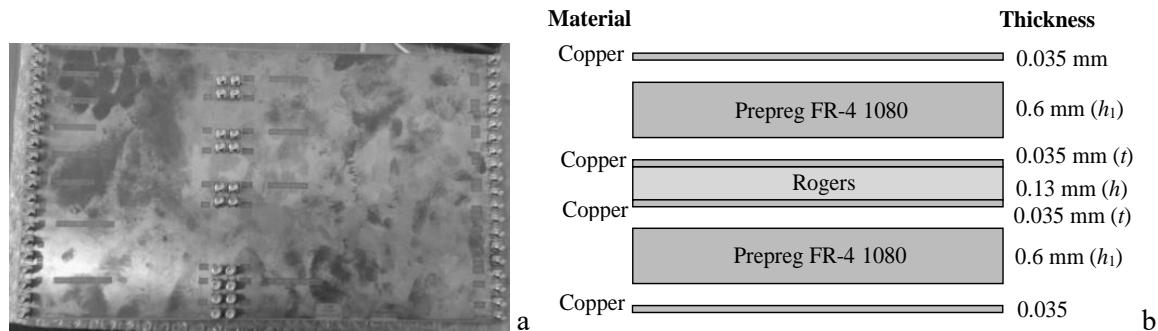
Photograph (a) and stack (b) of the breadboard model of the PCB with MR.
